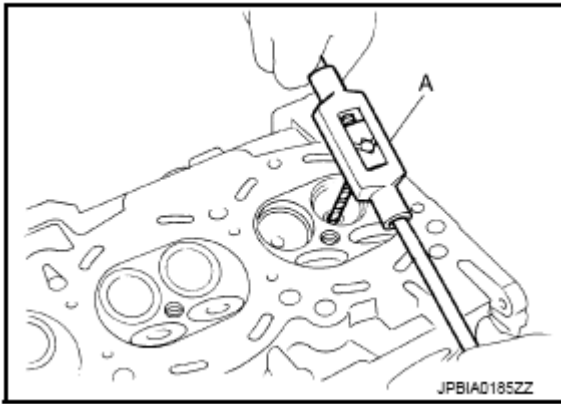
Reaming Cylinder Head Valve Guide (EXH) Hole Using Valve Guide Reamer
